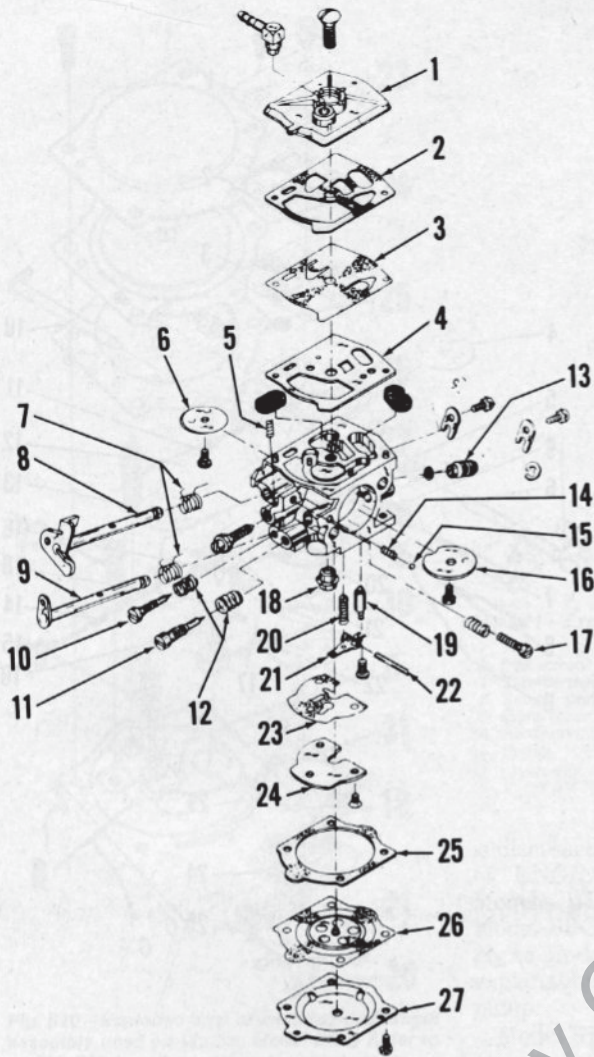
Exploded view of Walbro WS diaphragm carburetor.
